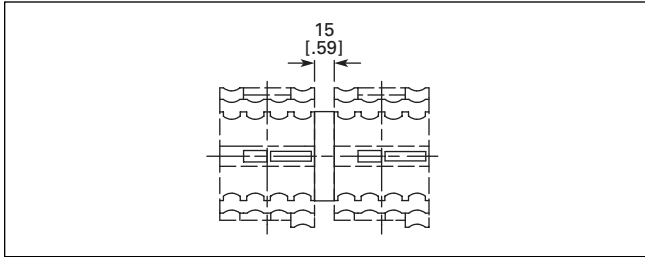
Frame L – M. XTCEXMLM Mechanical Interlock — Approximate Dimensions in mm [in]
